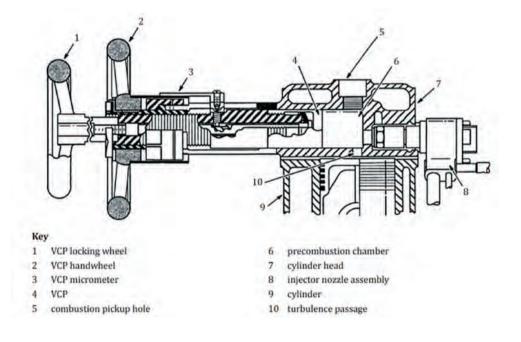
Test engine assembly — Engine cylinder head and handwheel assembly
